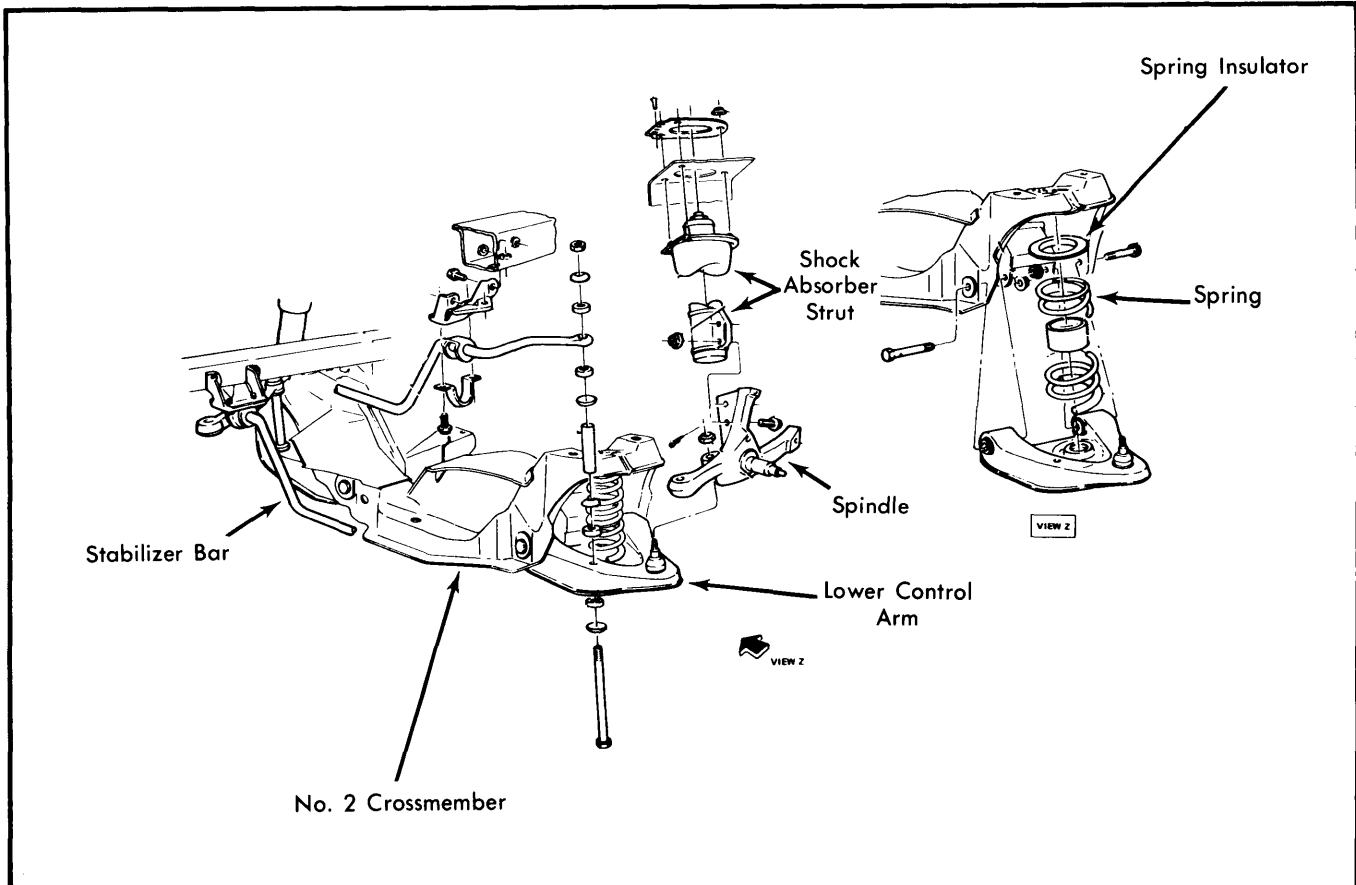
Exploded View of Ford Motor Co. Single Arm Front Suspension Assembly
